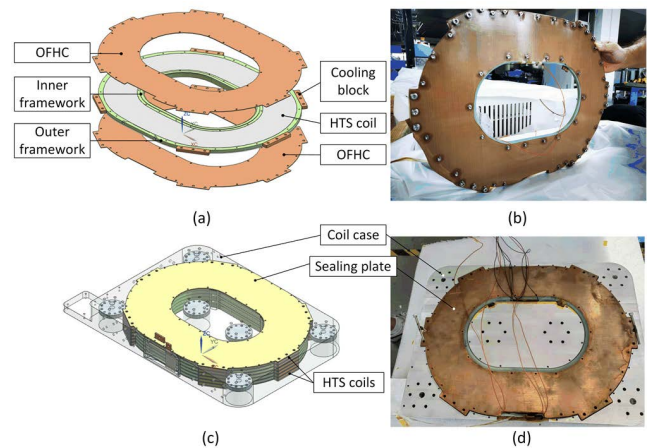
Fabrication of HTS coils. (a) Composition of an HTS coil; (b) picture of an HTS coil before curing; (c) assembly drawing of HTS coils and coil case; (d) picture of the coil case before curing.
